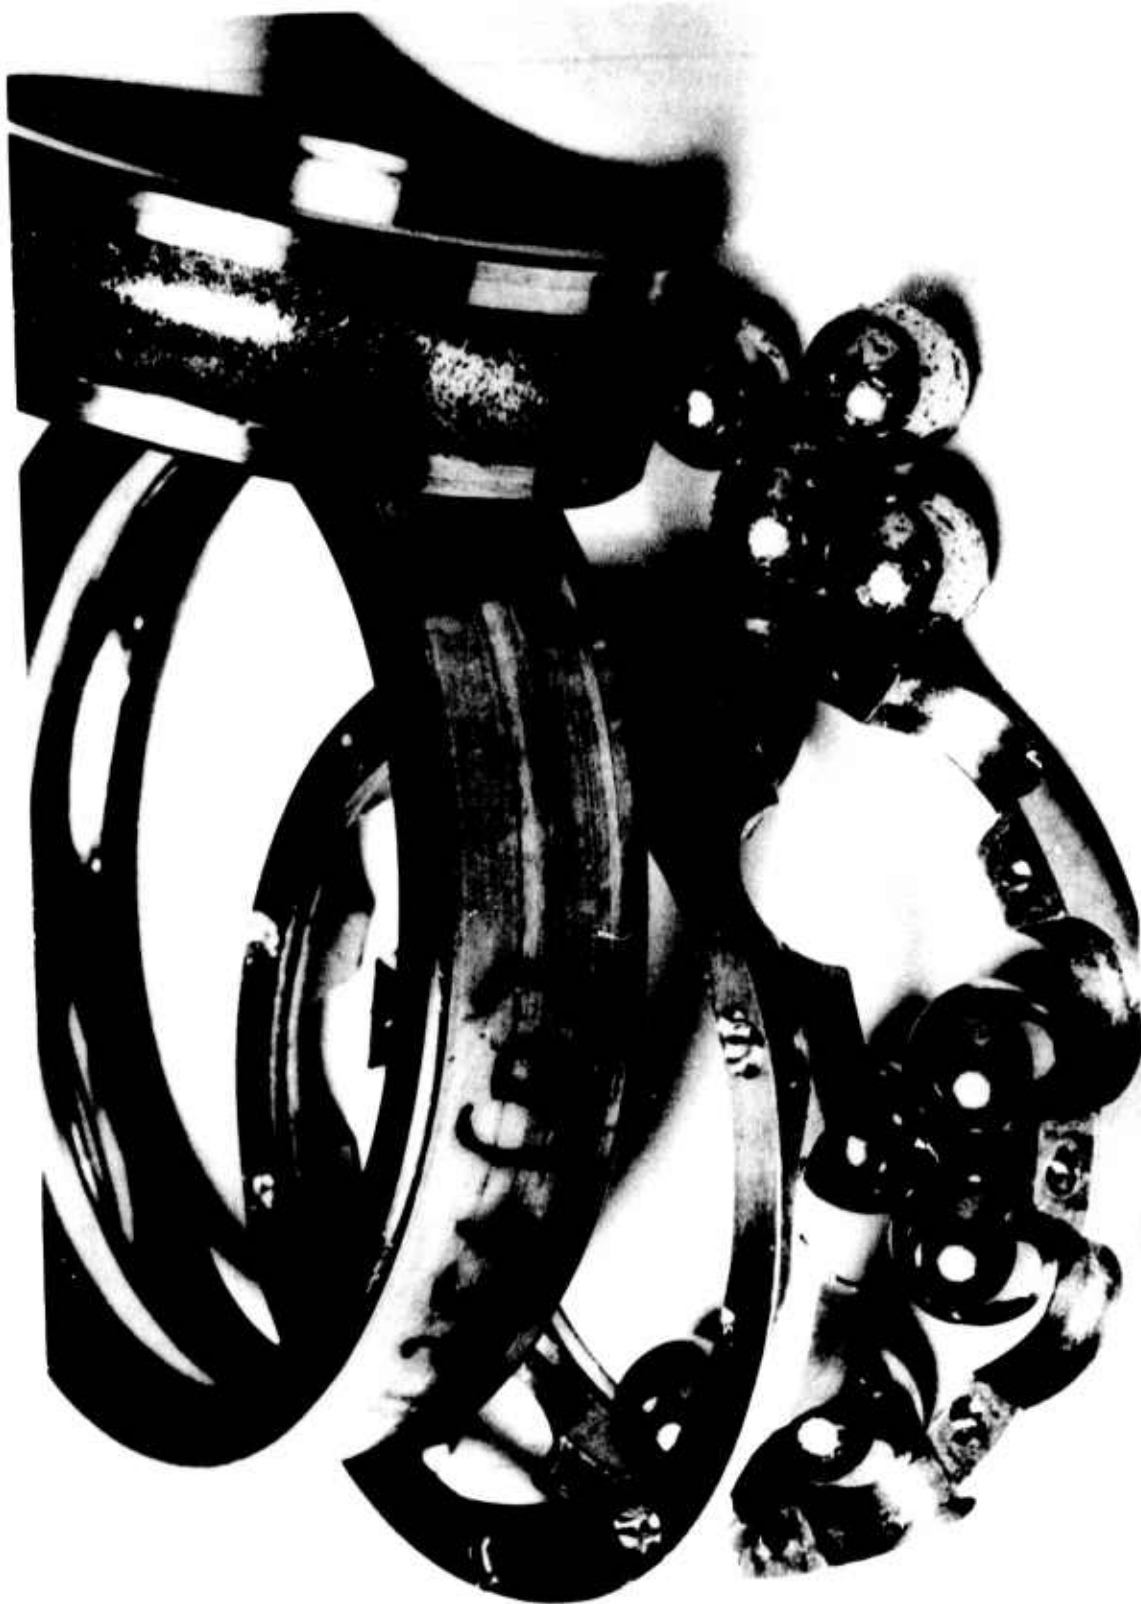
Spalled Ball Bearing - Adaptor Gearbox.
